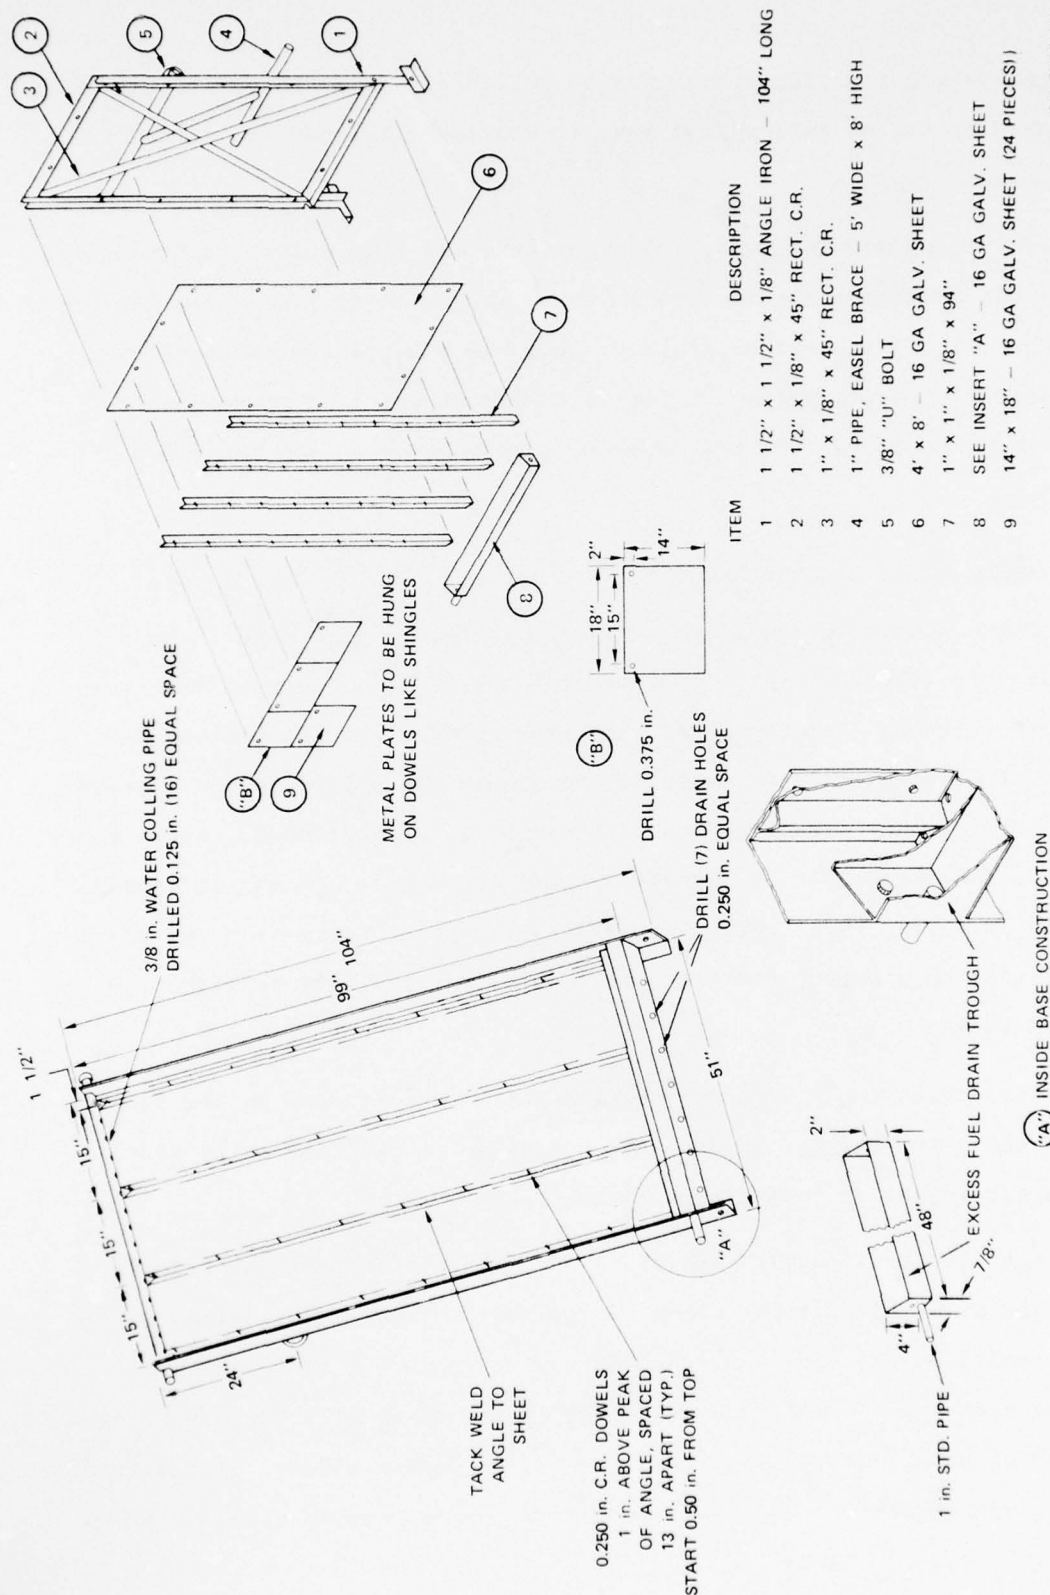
CONSTRUCTION DETAILS OF CASCADE FIRE PANEL
